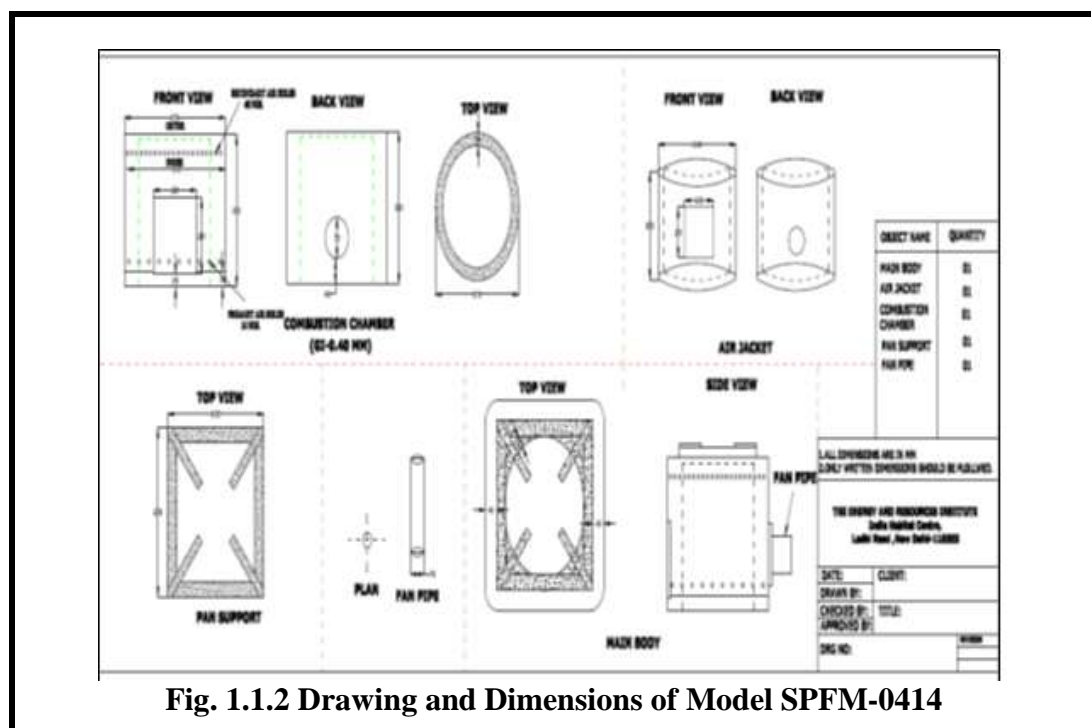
Drawing and Dimensions of Model SPFM-0414
